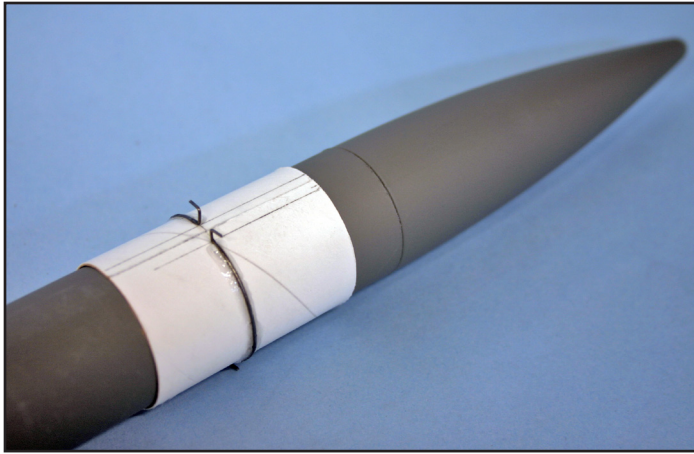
First prototype fly-away rail guide showing the hooks that mates with the launch rail.
